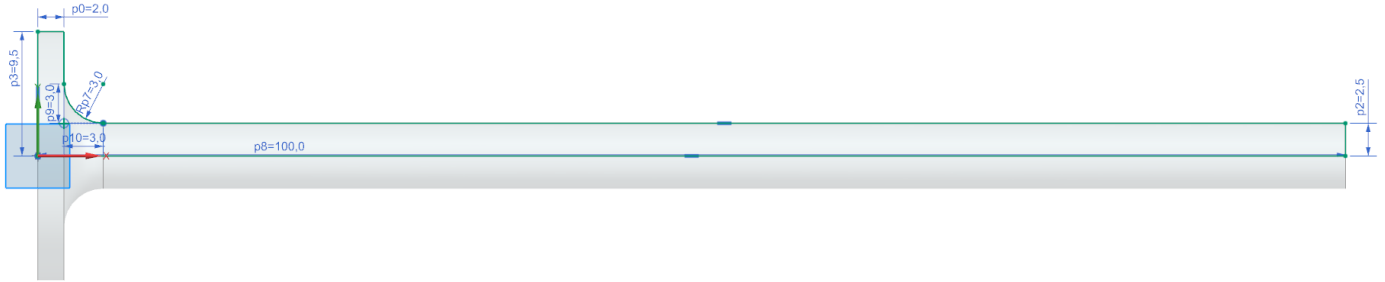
Sketch of the pintle sleeve plate. Finished component is axisymmetric around the horizontal x -axis.
